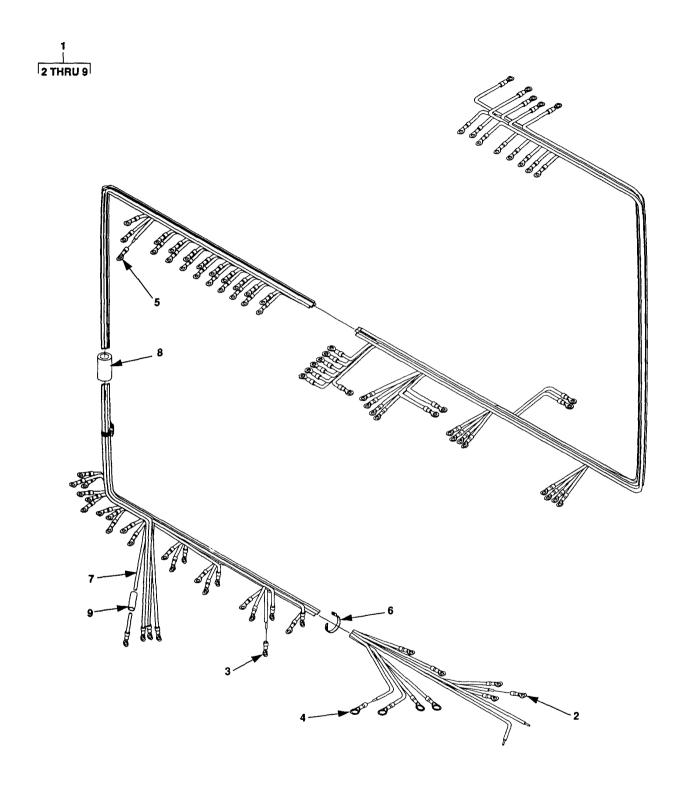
Switch Box Harness Assembly (Sheet 1 of 2)
